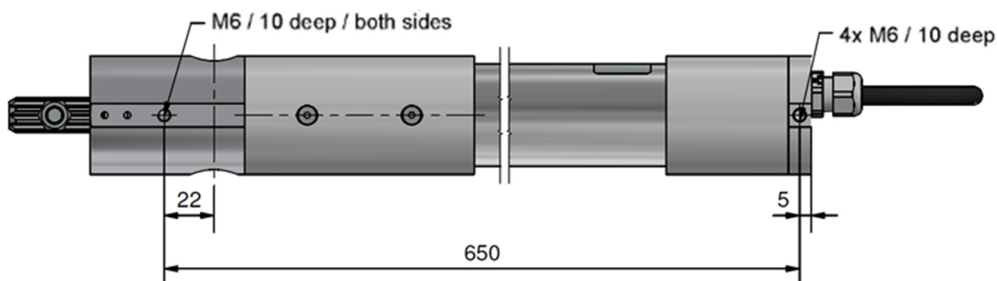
Mounting points 3062.00-V01XXX / 3062.00-0011
